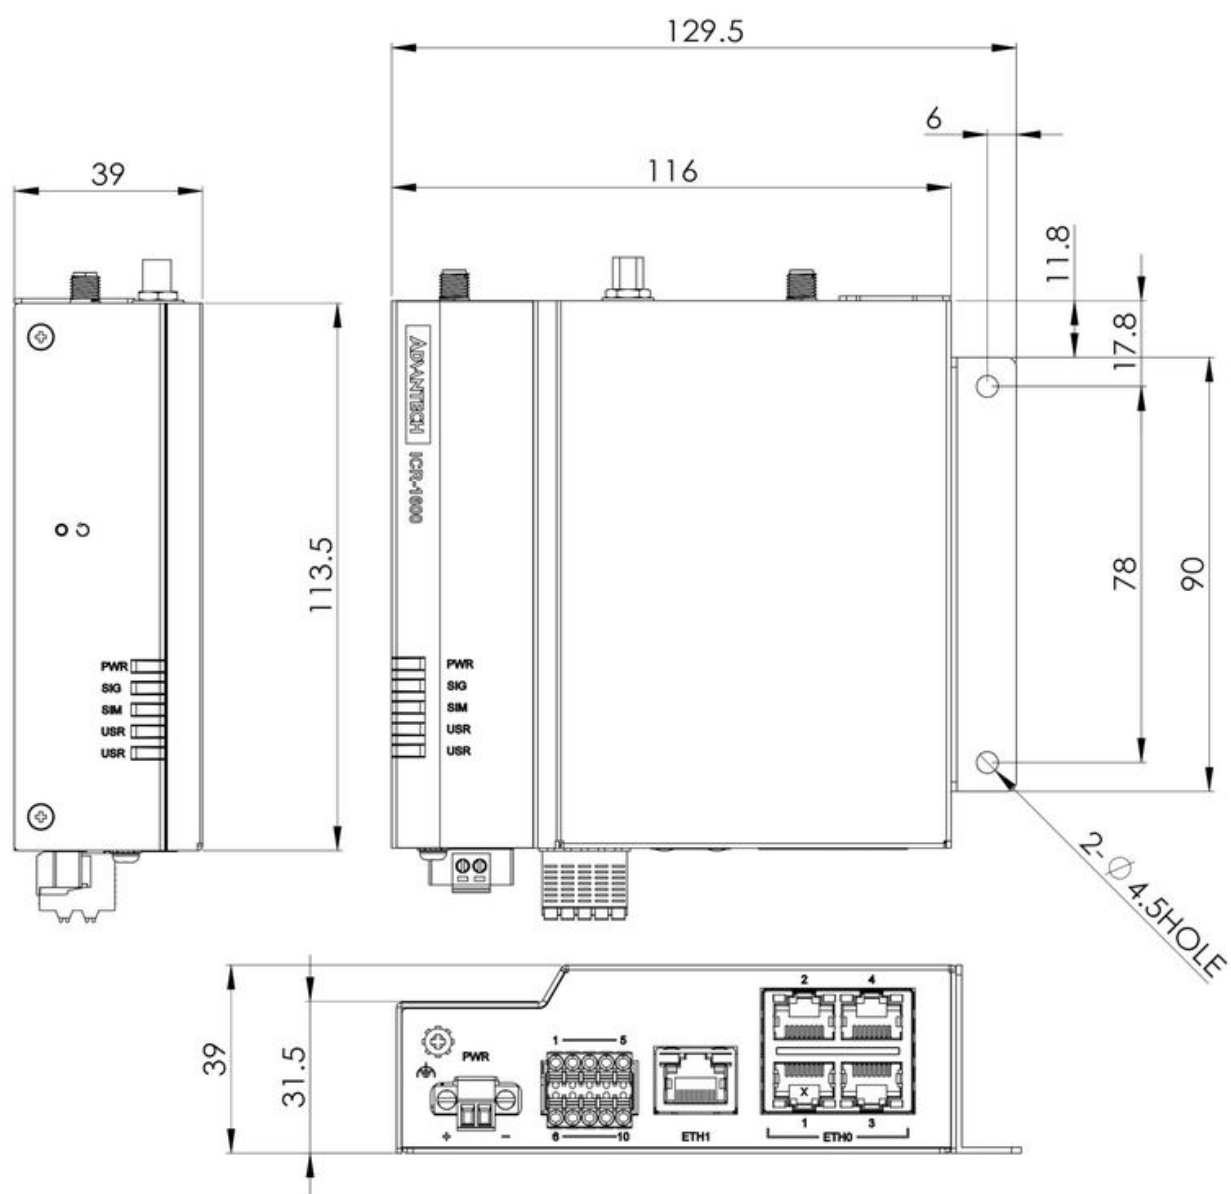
Router dimensions – Front, Top and Side view with wall-mounting holder
